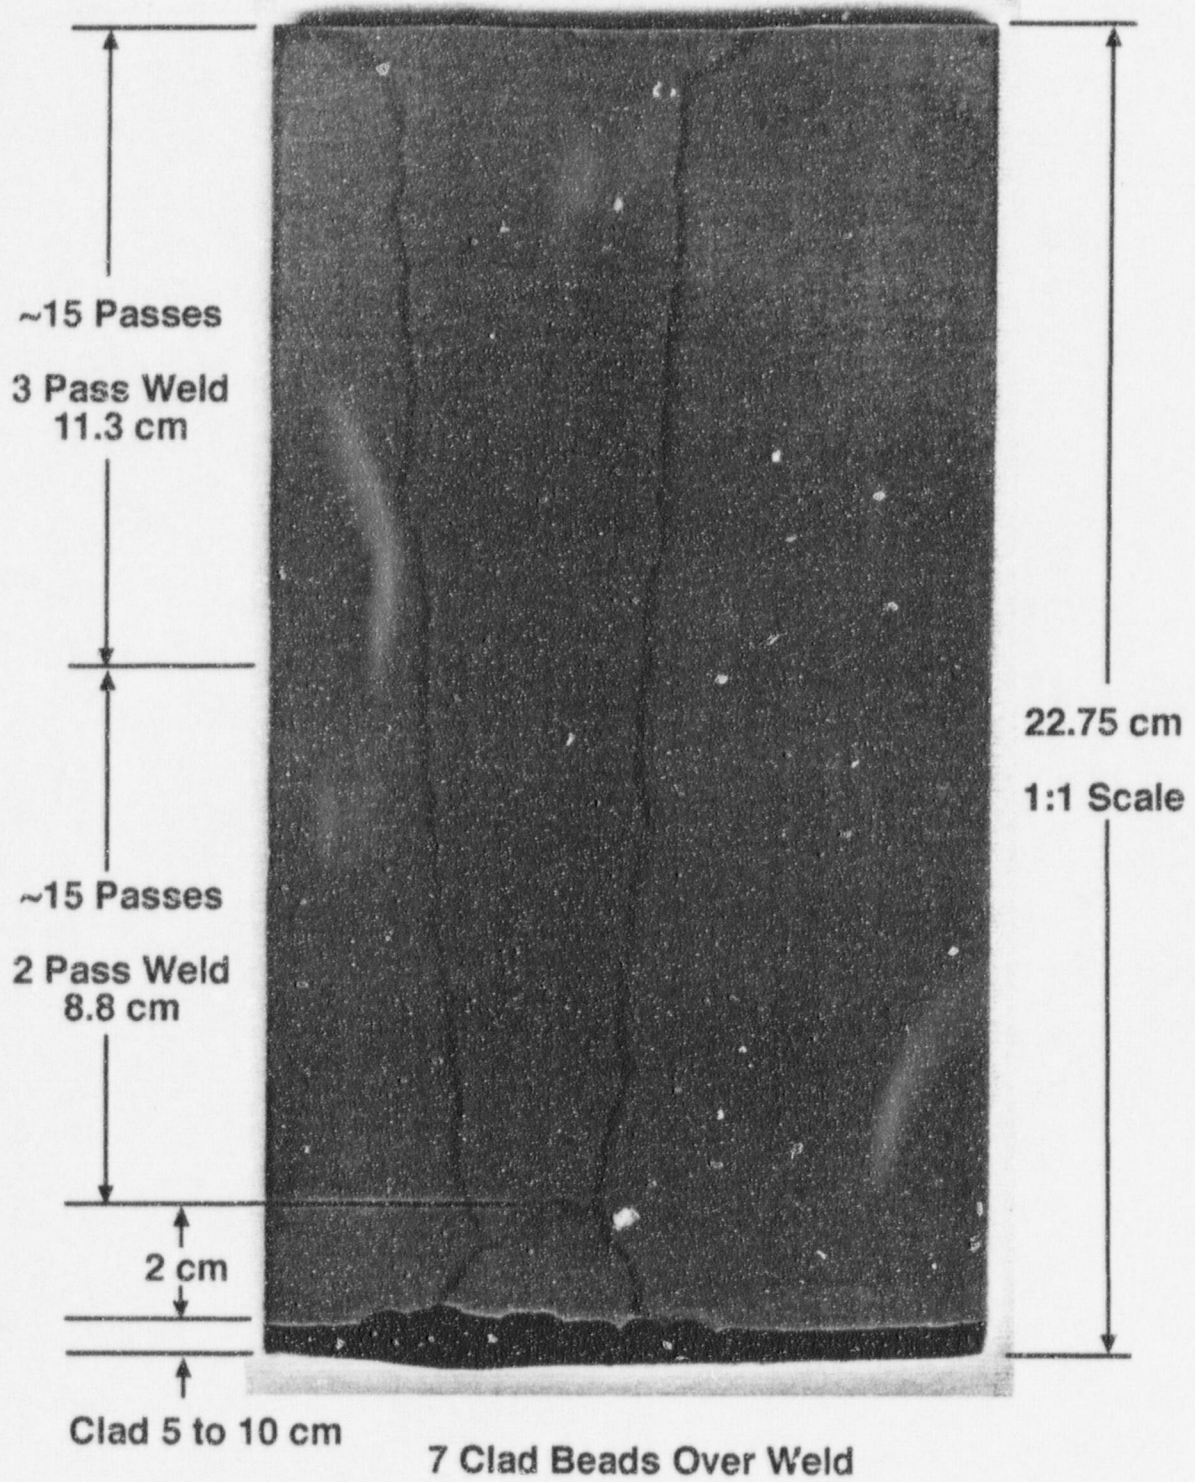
Cross Section of Uniform Thickness Single V Weld
